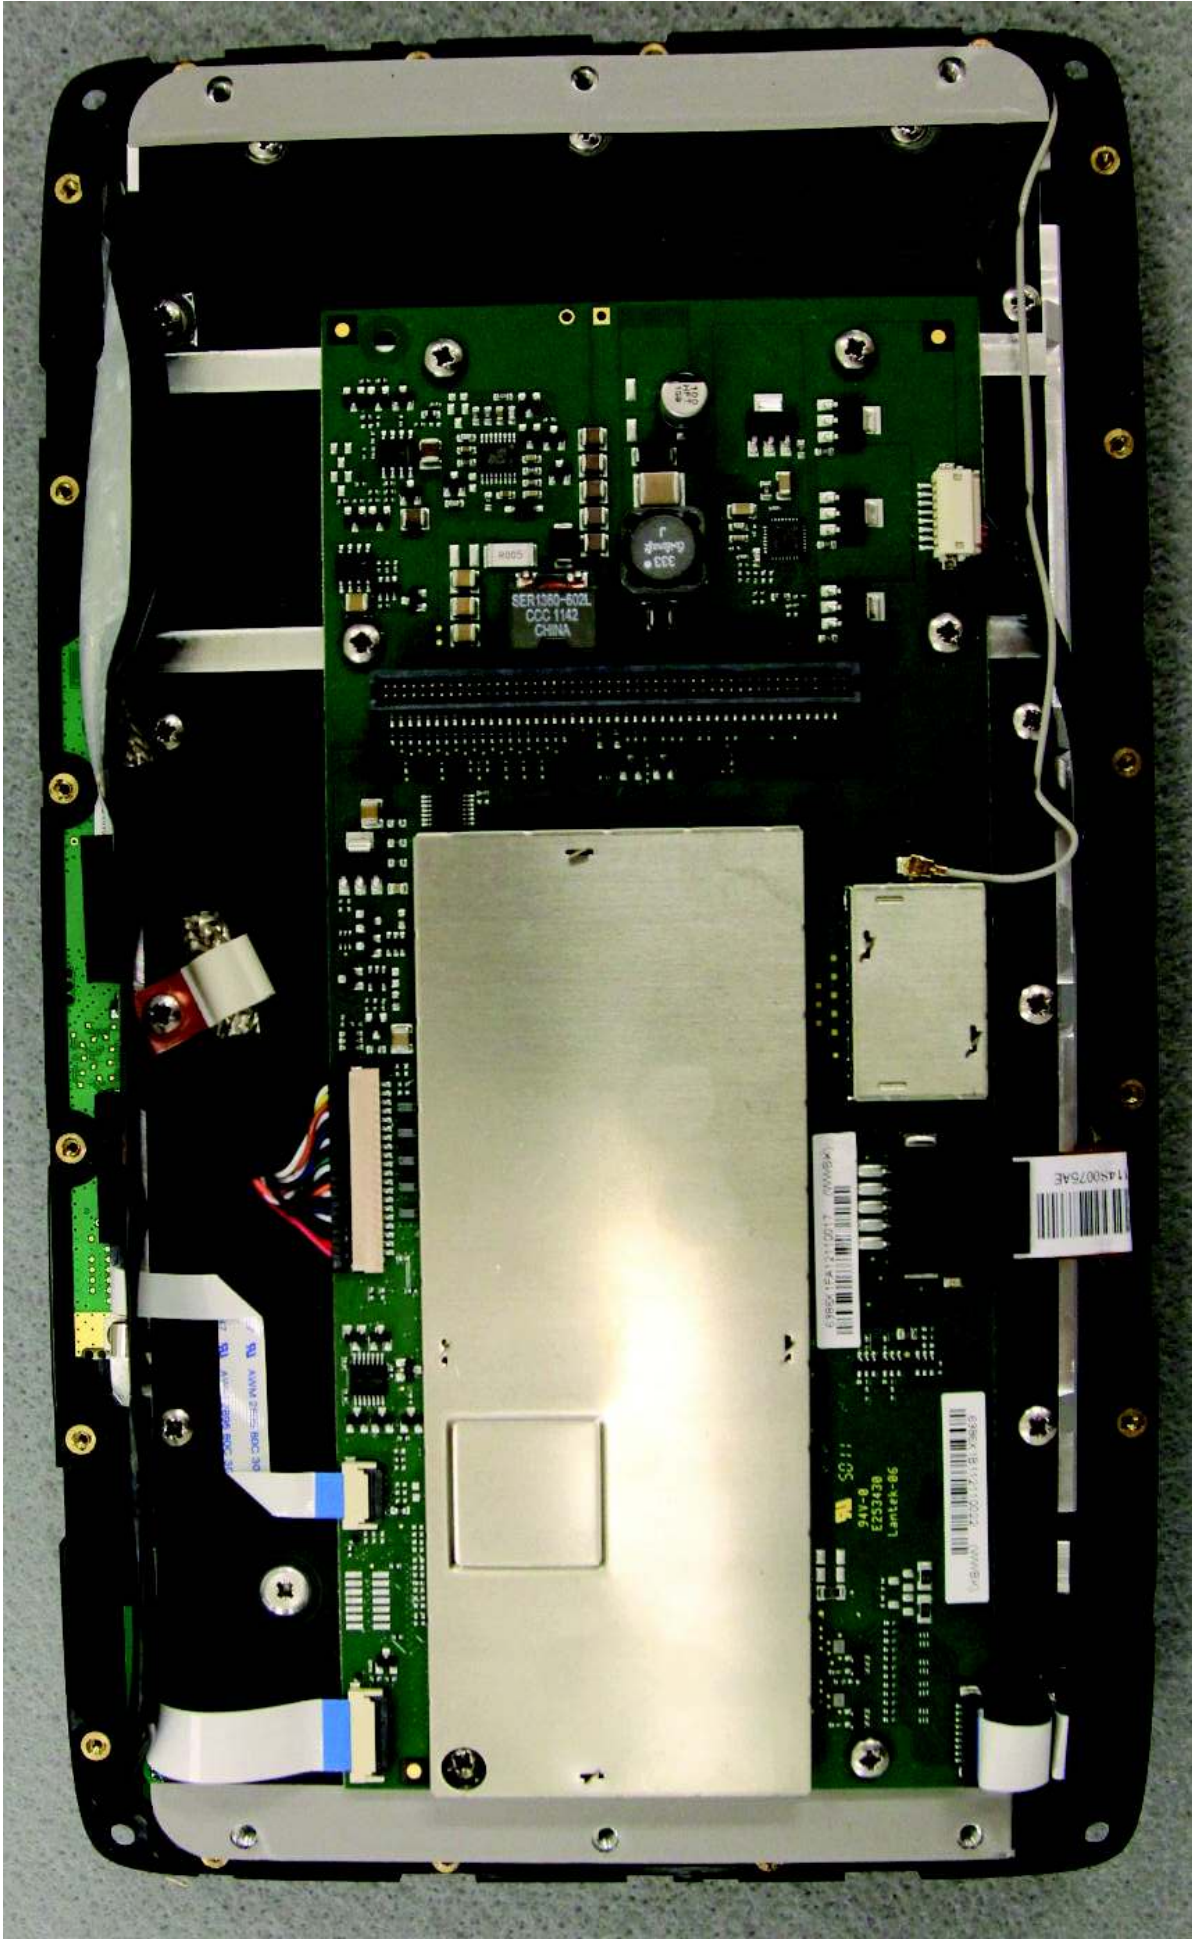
9 inch LCD rear with heatsink and CPU fitted
